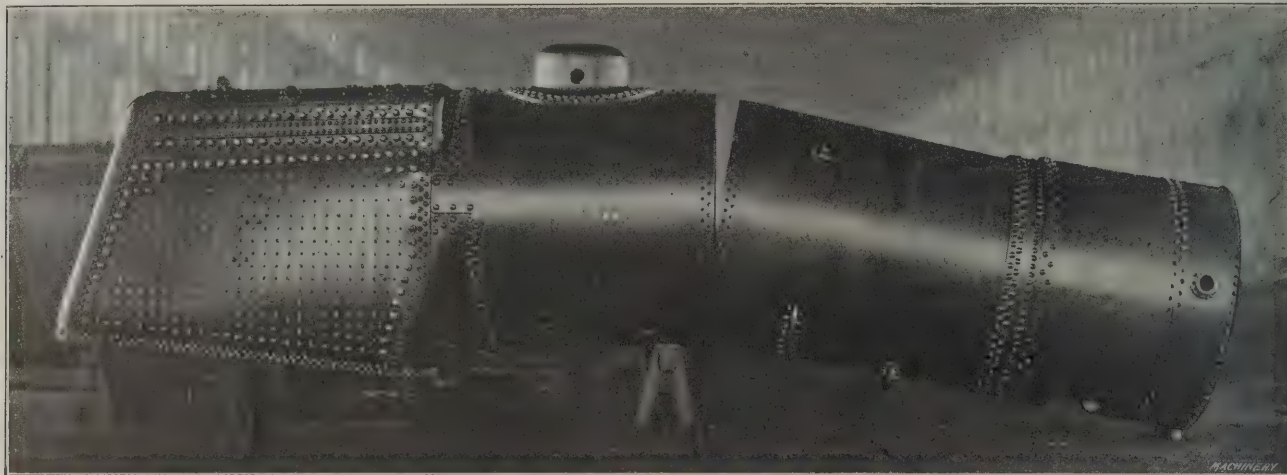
The Boiler just before the Front and Rear Sections are riveted together
